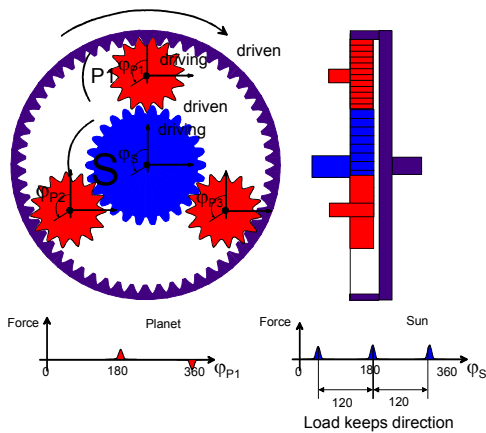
Planetary gear with 3 planet gear wheels and forces in planet and sun at one revolution
